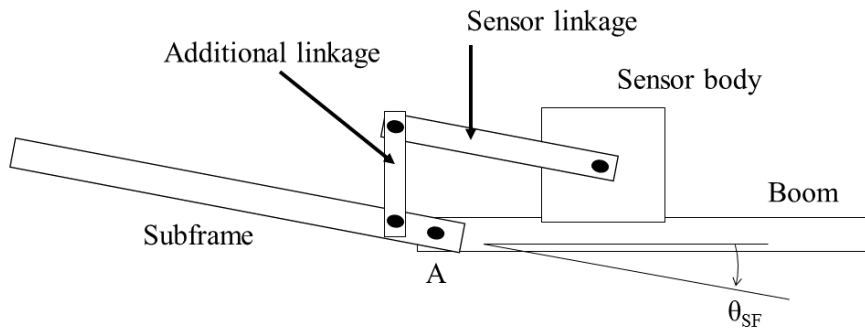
The mounting location between the boom and subframe is shown. Mounting the angle sensor required an additional linkage to be installed.
